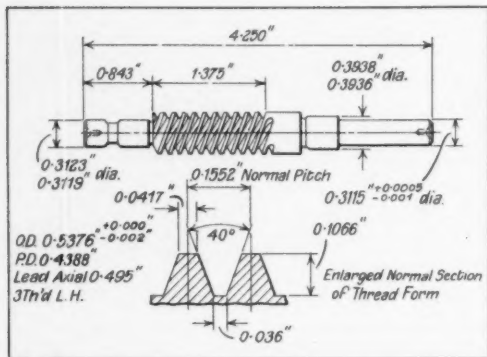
Thread-ground driving worm shaft for the National Class 31 accounting machine
